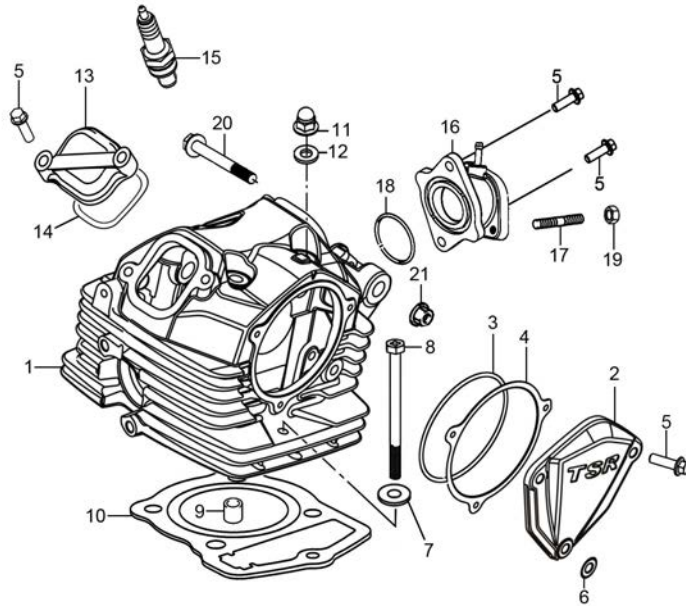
CYLINDER HEAD&CYLINDER HEAD COVER (P05-S010-0044)
